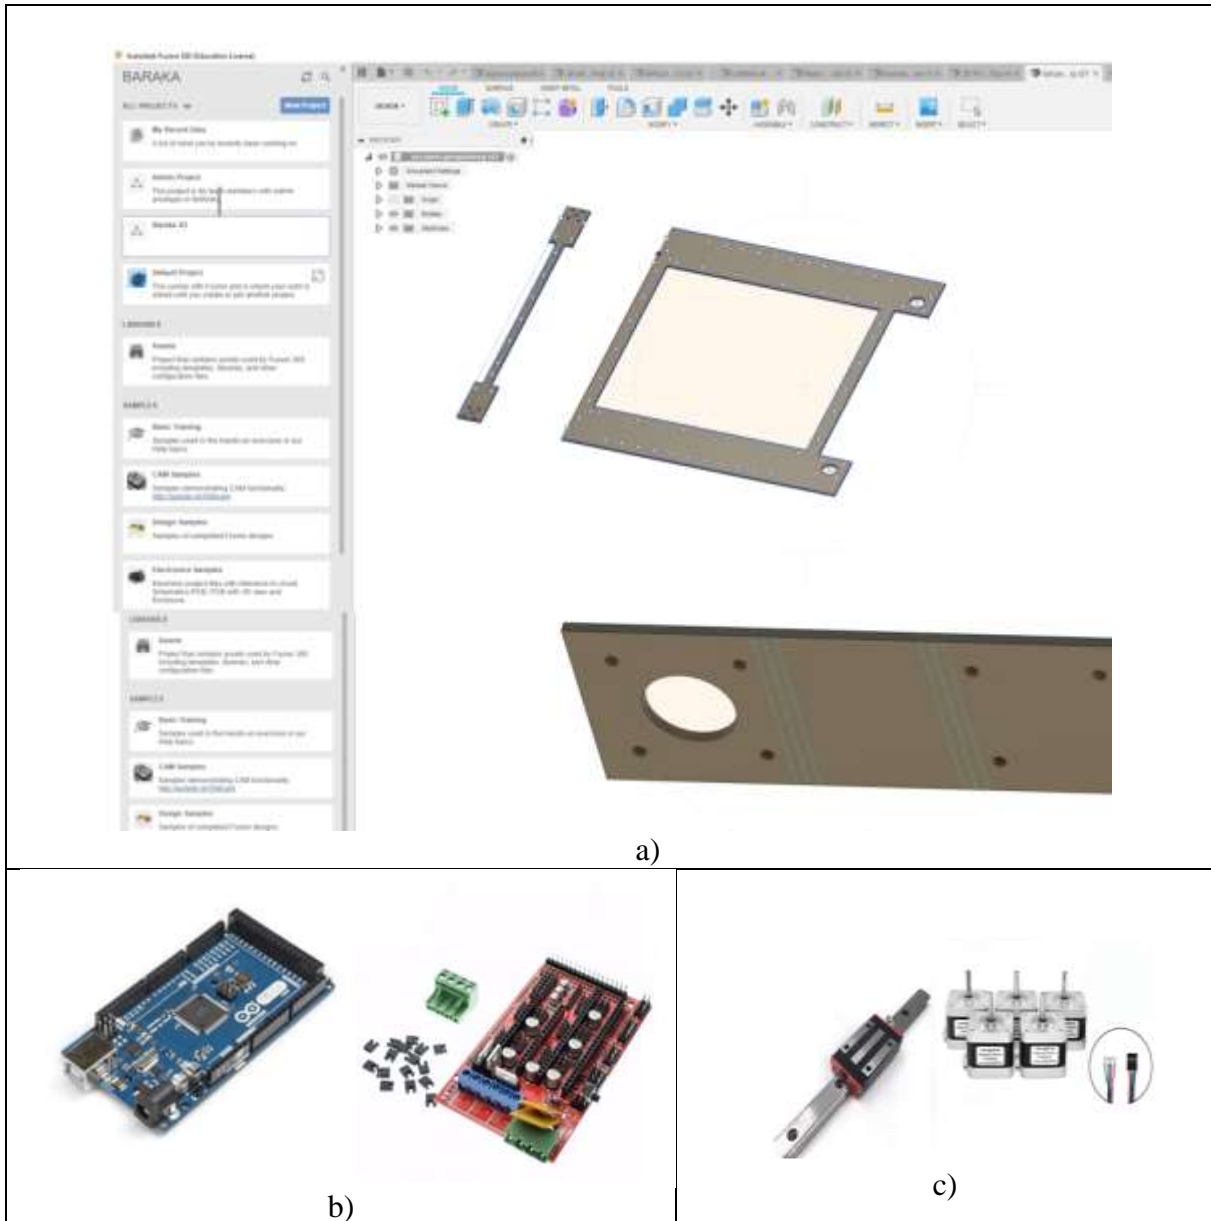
Production of 3D printer a) Designs of motor bearings in the solid modeling program b) Arduino mega control card c) MGN12 linear guideway, trolley and Nema 17 stepper motors.
